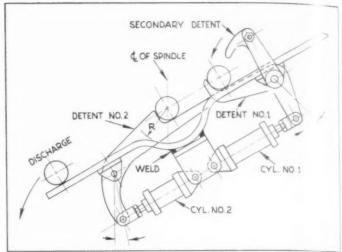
Diagram of vise which may be used for such work by holding the steam superheater tubes shown in Fig. 4. The vise assembly is incorporated on the feed rain and on the return stroke, a valve closes the small cylinder, thereby opening the vise jaws. As the work is thrown into the vise and feed starts, the clamping cylinder opens and closes the jaws. Action is practically automatic.
